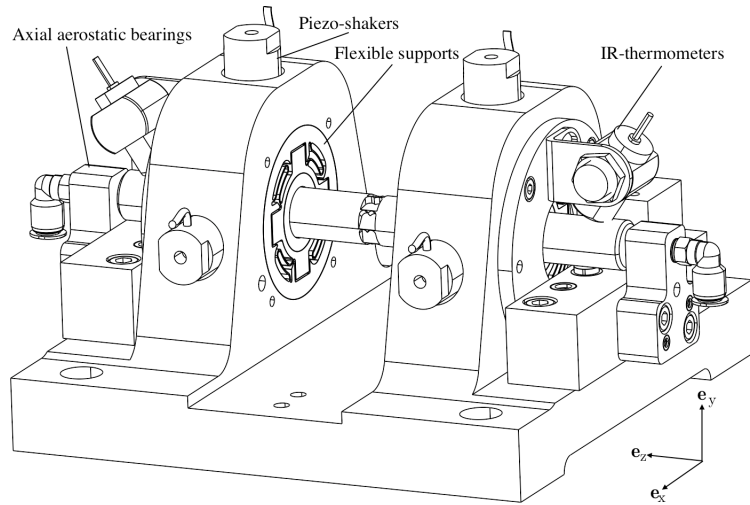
Near-complete assembly, with the steel frame accommodating the different organs. The turbine distributor around the impulse turbine is missing for presentation purpose
